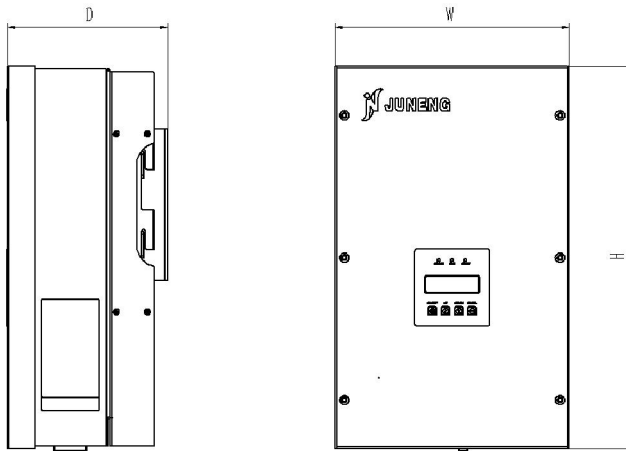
Dimension drawing of Solar pumping inverter (unit : mm)
